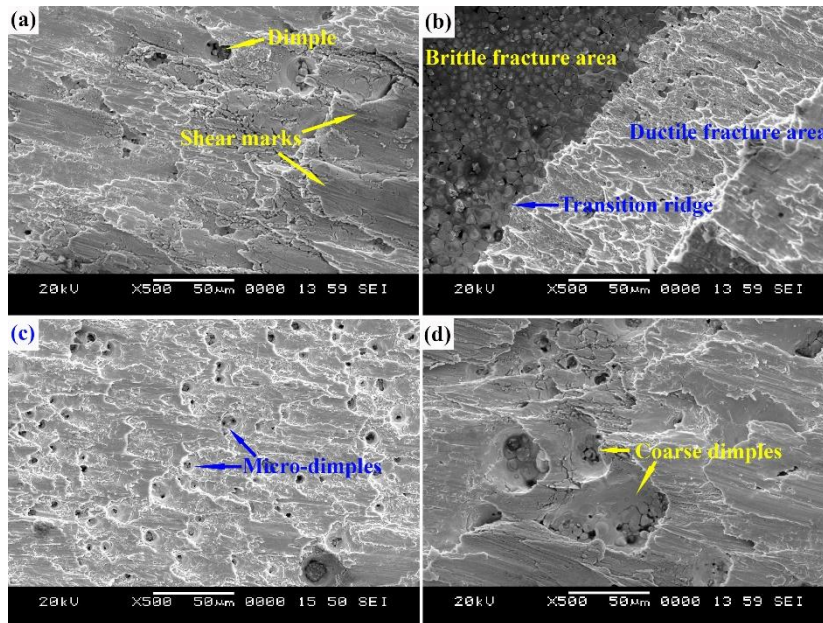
SEM micrographs of fractured surfaces showing various fracture details, (a) ductile fracture surface with shear markings, (b) mixed-mode of fracture with transition ridge, (c) fractured surface with a high density of micro-dimples, and (d) fractured surface with coarse dimples
